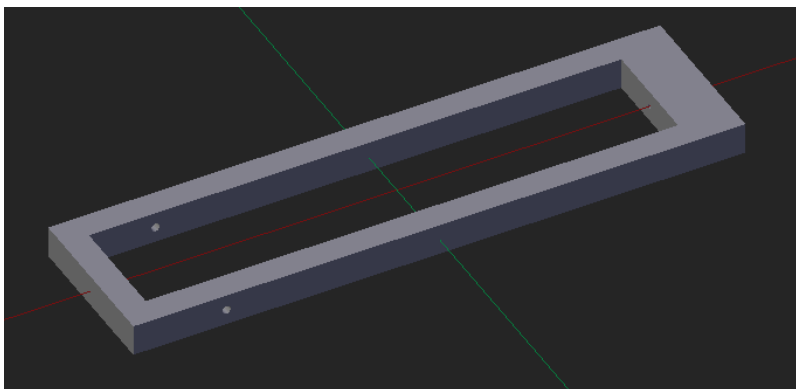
Design of a reusable channel mold-holding jig for 3D printing, which is essential for consistent and scalable production of microfluidic devices.
